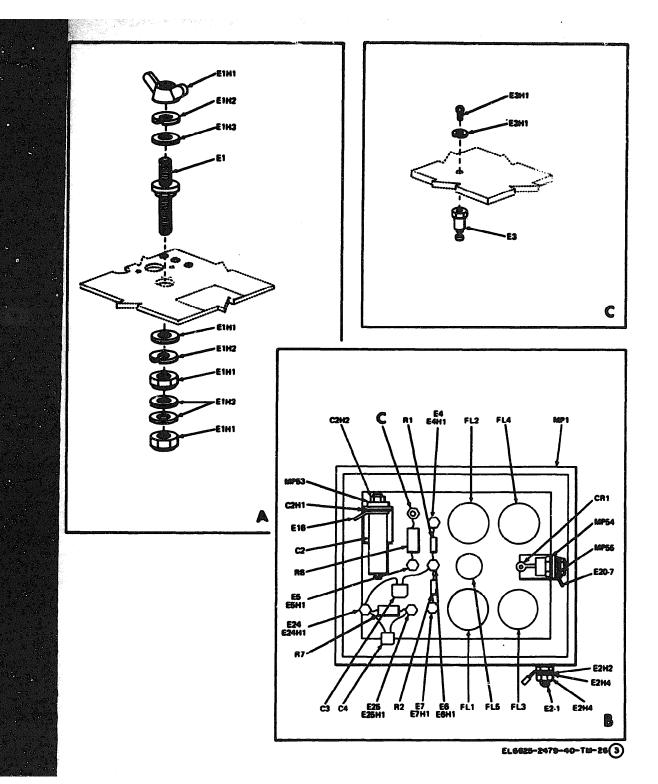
3. Panel assembly 1A3, parts location (part 3 of 5).
